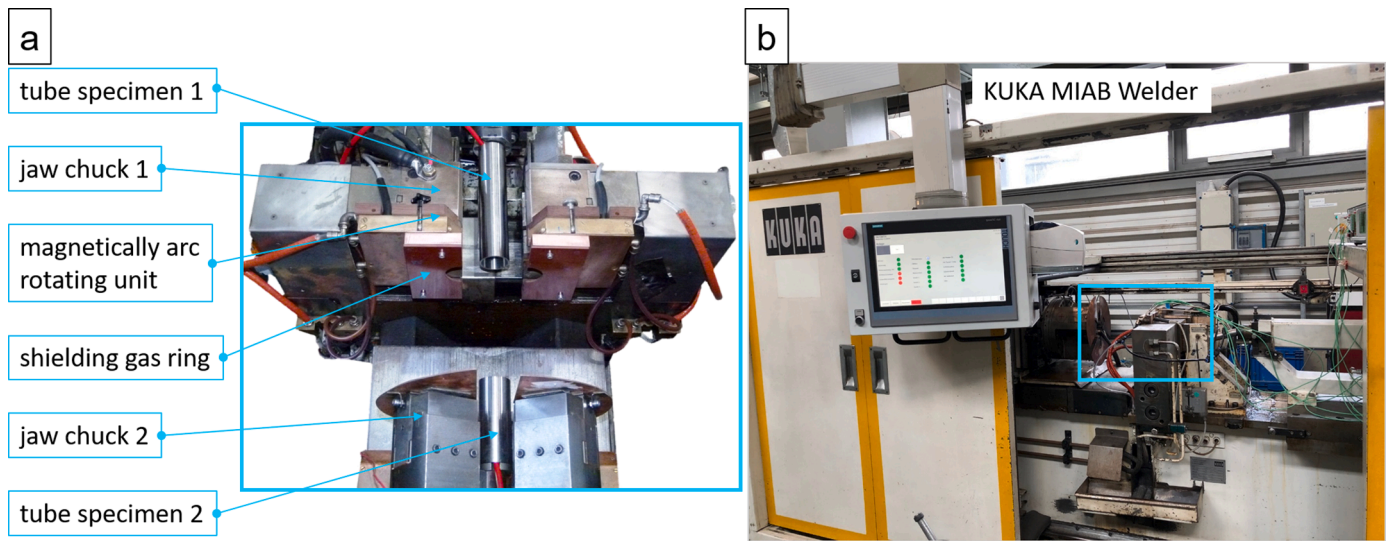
Automatic MIAB welding system KUKA MagnetArc 5000/1000; a: detailed view of the clamping and welding device, b: overview of the MIAB welding machine.
